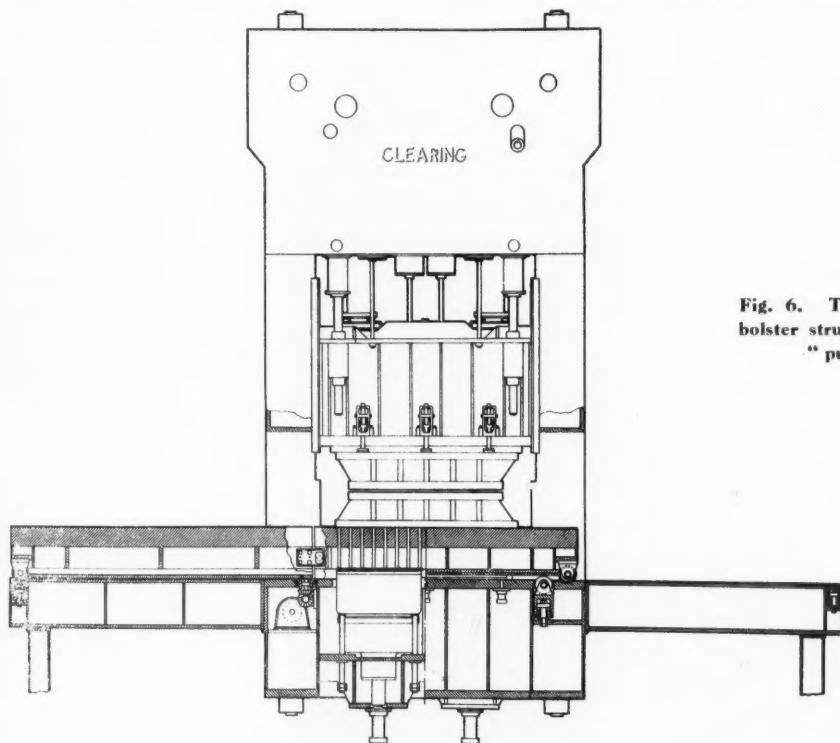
This drawing shows the special bolster structure in a press equipped with "push-button" die setting.
